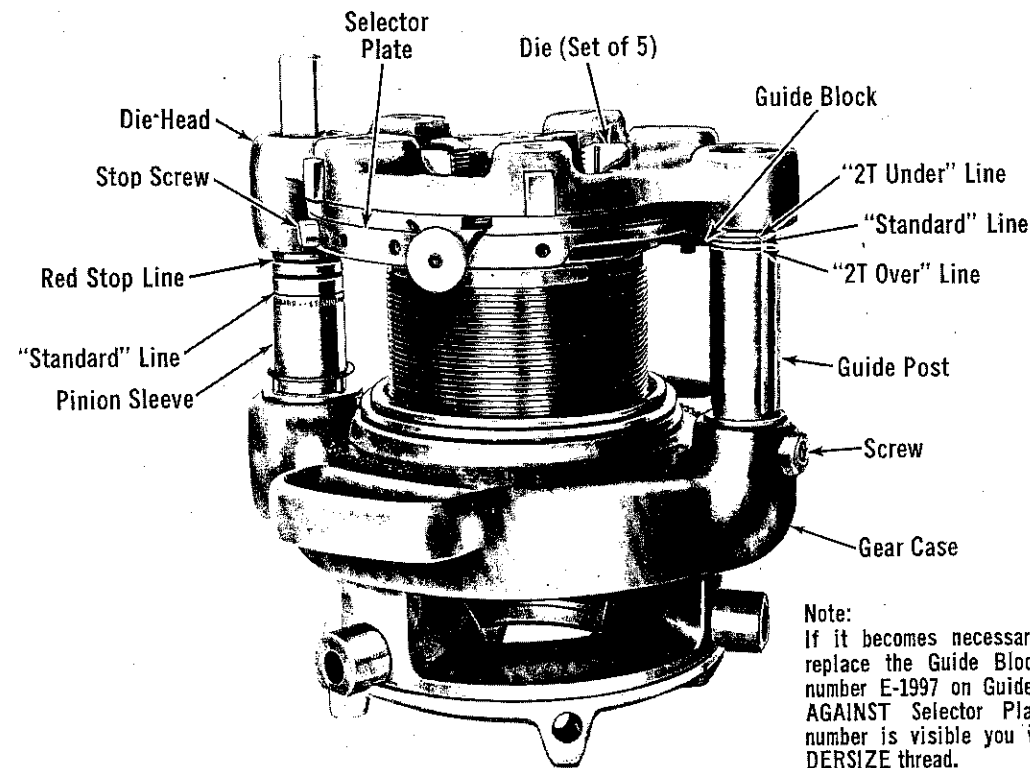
No. 141 Geared Threader showing Pinion Sleeve and Guide Post Reference Lines.
